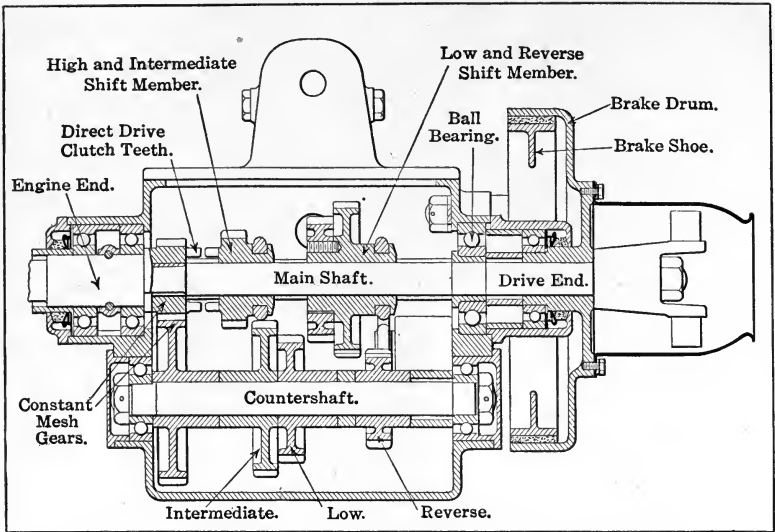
Arrangement of Gears and Shafts in Typical English Three-Speed Selective Gear Box.
